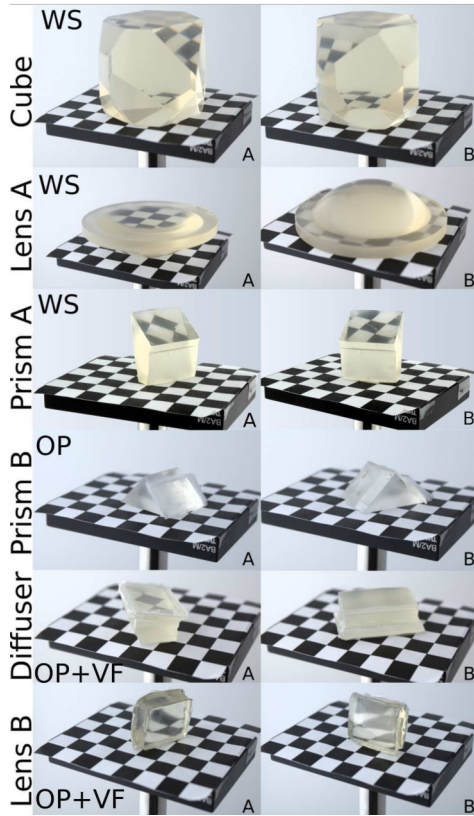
A series of photographs showing optical components built using our manufacturing technique based on 3D printing, optical bonding (OP), and vacuum forming (VF). Photographs of sample parts produced by wet-sanding are provided. With respect to wet-sanding (WS) approach, note that our technique promises least amount of labor work for prototyping 3D printed optics.
